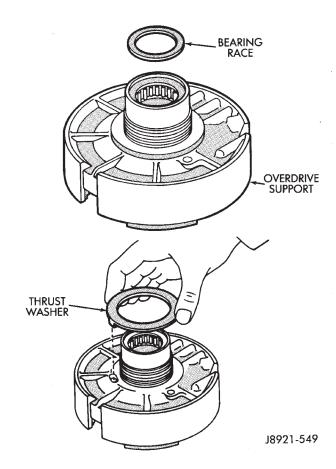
Removing Clutch Drum Thrust Washer And Race
